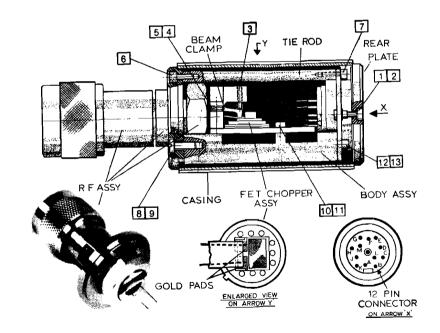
Access and layout diagram - 6910 and 6930 Series Sensors
